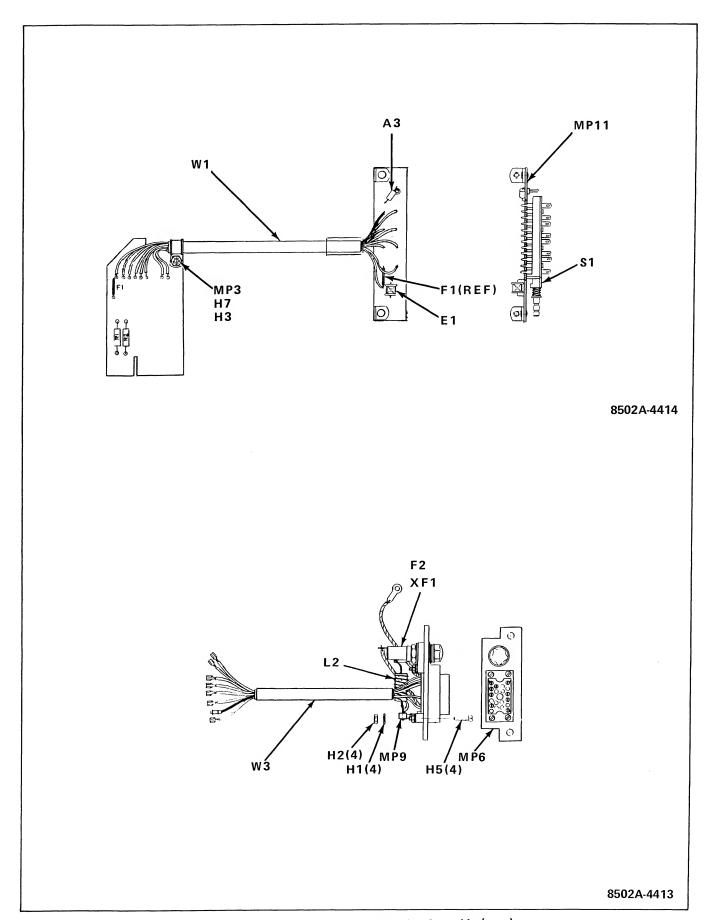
Front/Rear Input Switching Assembly (cont)
